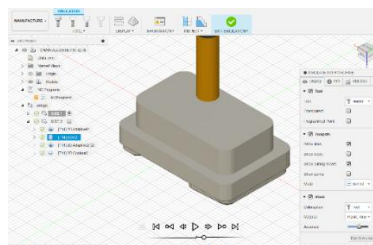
Simulation view on fusion 360 setup 2 with flat end mill 6 mm
